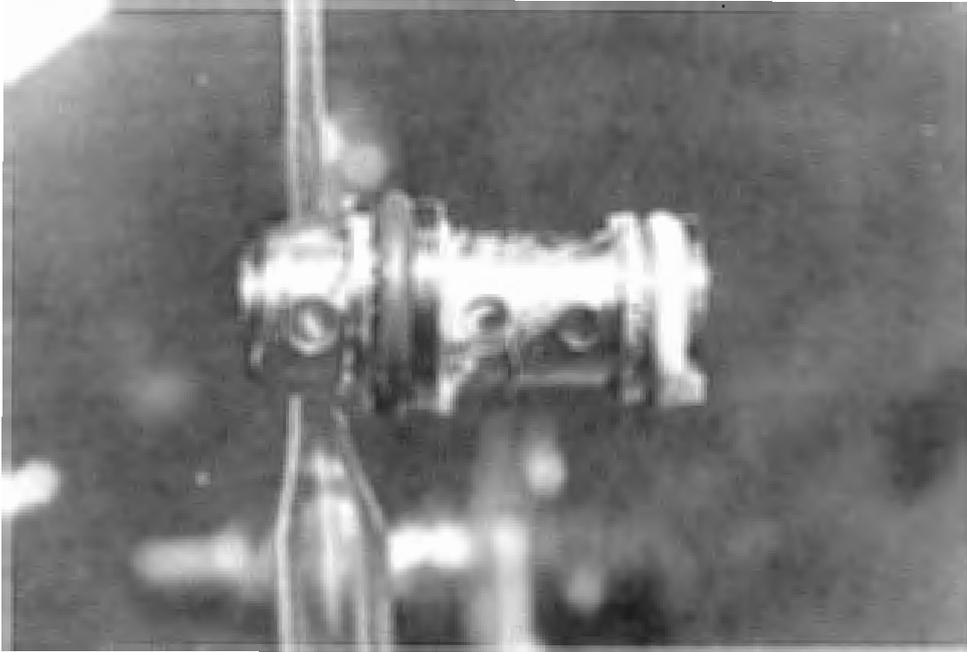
Gelatinous deposit on left engine FCU bypass valve sleeve assembly.
